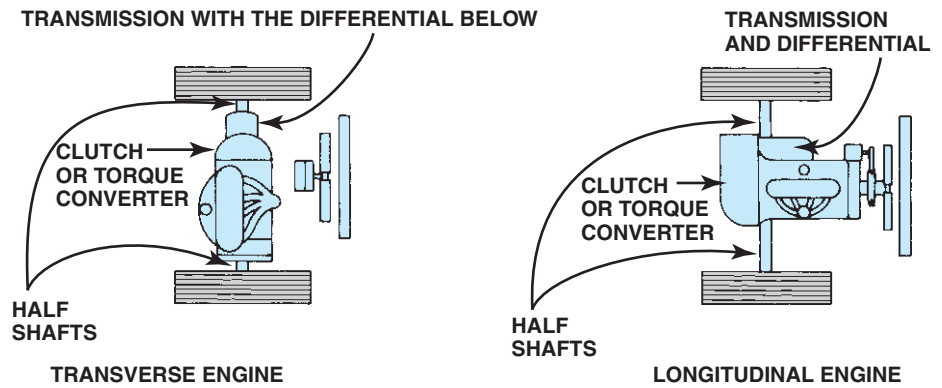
Two types of front-engine, front-wheel drive.
